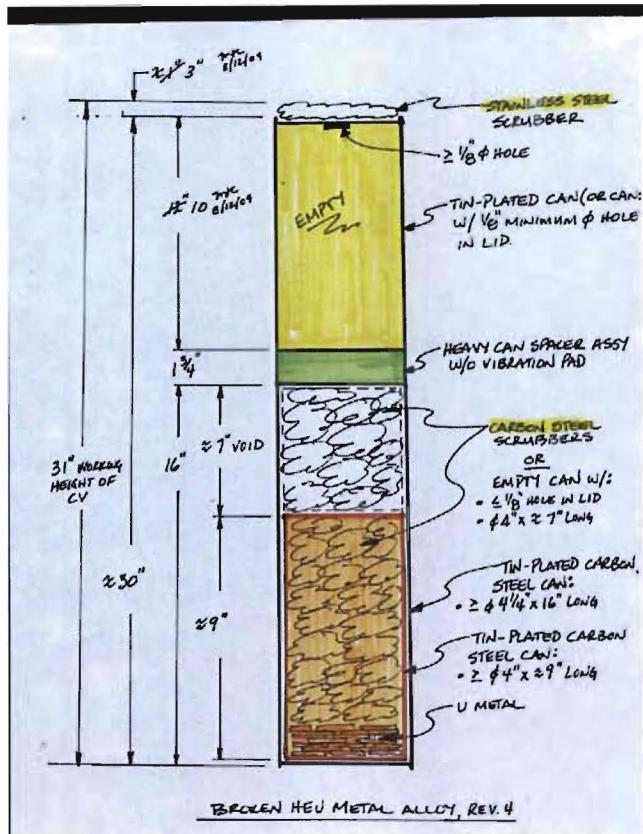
Packaging engineer drawing of typical ES-3100 package configuration.
